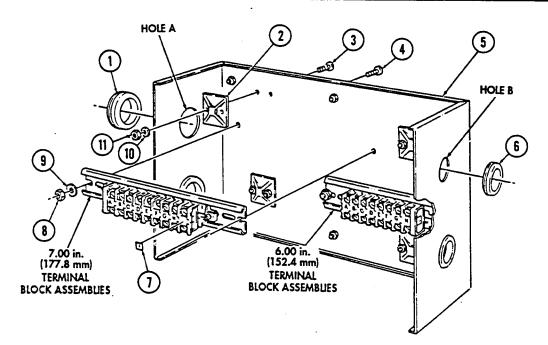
Terminal Block Assemblies and Cable Tie Holder Installation.
